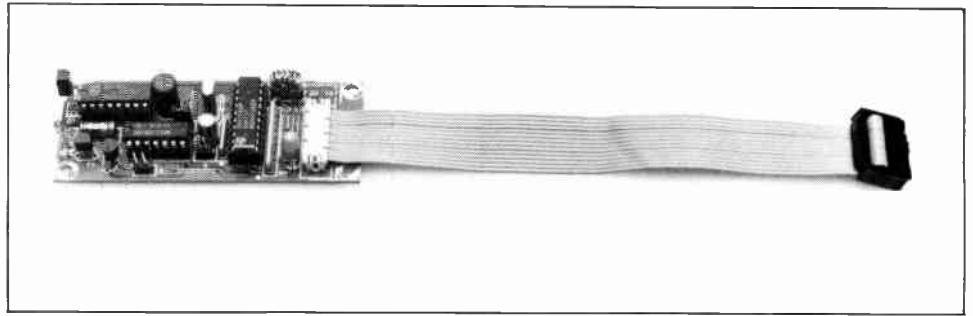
The IR receiver is hooked to the Z80 card via a length of 14-way flatcable fitted with an IDC socket at one end, and an IDC plug (for PCB mounting) at the other.
